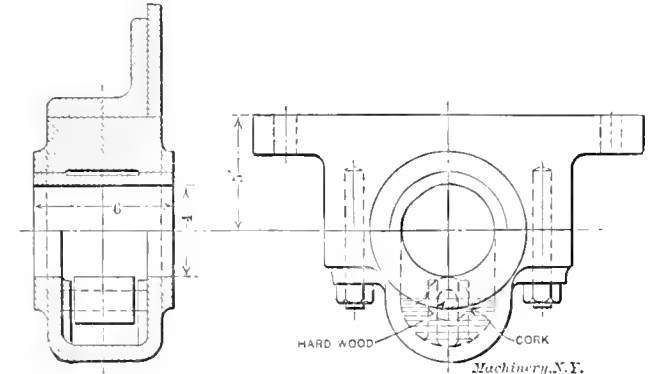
Self-lubricating Bearing for Shafts in Crabs of 40 ton Capacity and larger.
